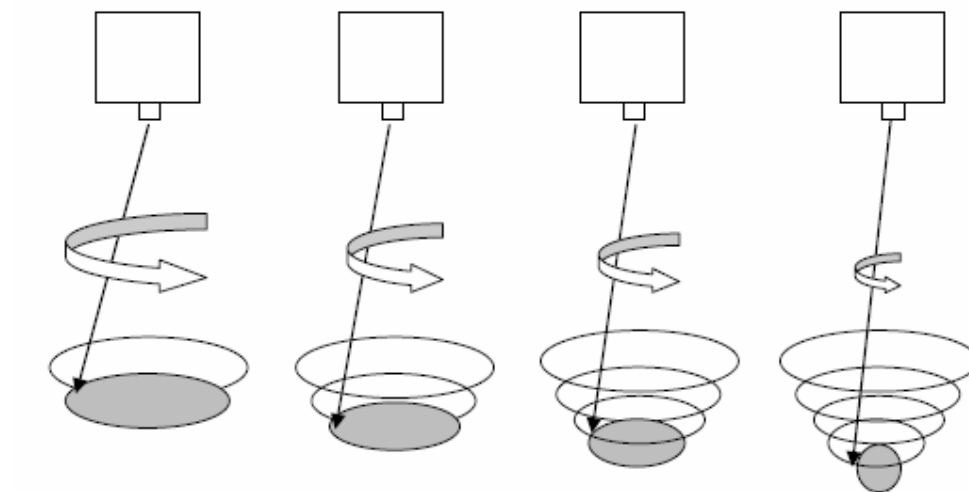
Laser path over sand core surface creating conicular module geometry [9].
